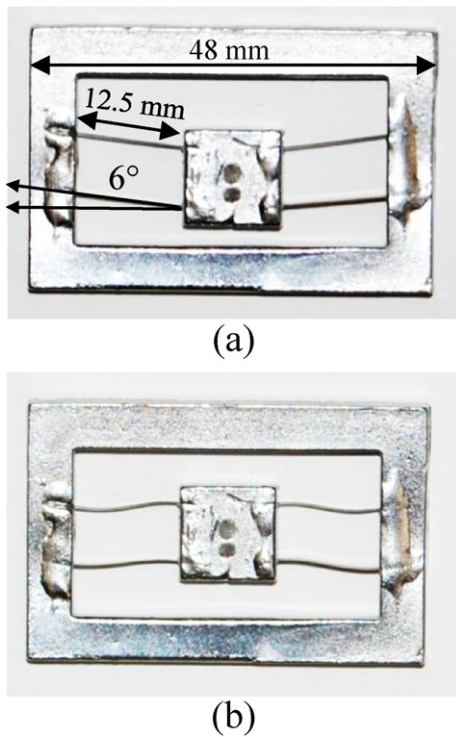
(a) Molded design in the first stable position. (b) The same device in the second stable position with the flexor elements deformed.
